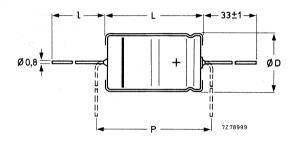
Style 1; see Table 1a for dimensions D, L, I and P.
